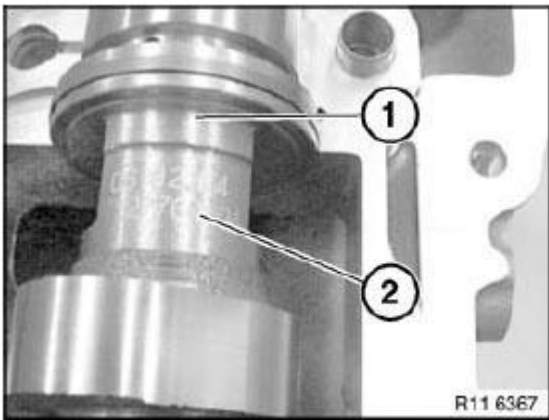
Identifying Part Numbers And Exhaust Camshafts
